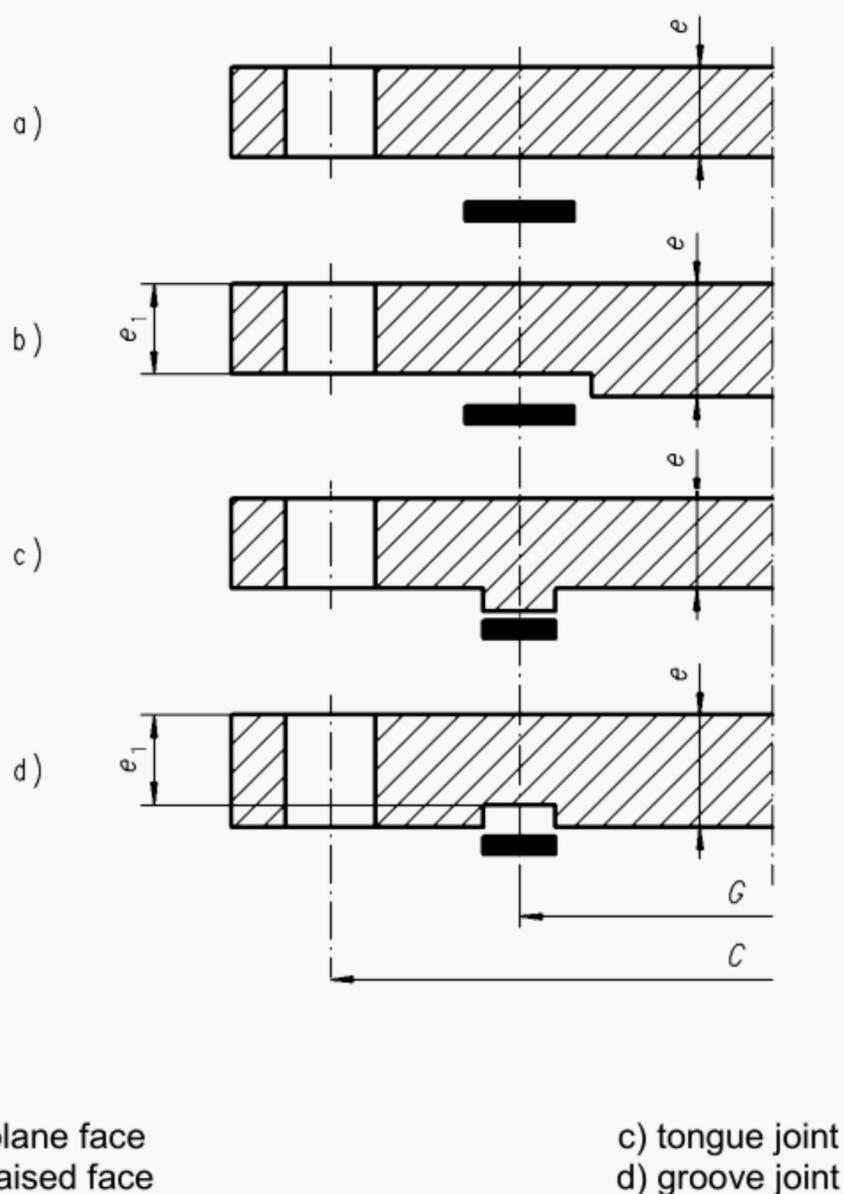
Bolted circular flat ends with gasket entirely within the bolt circle
